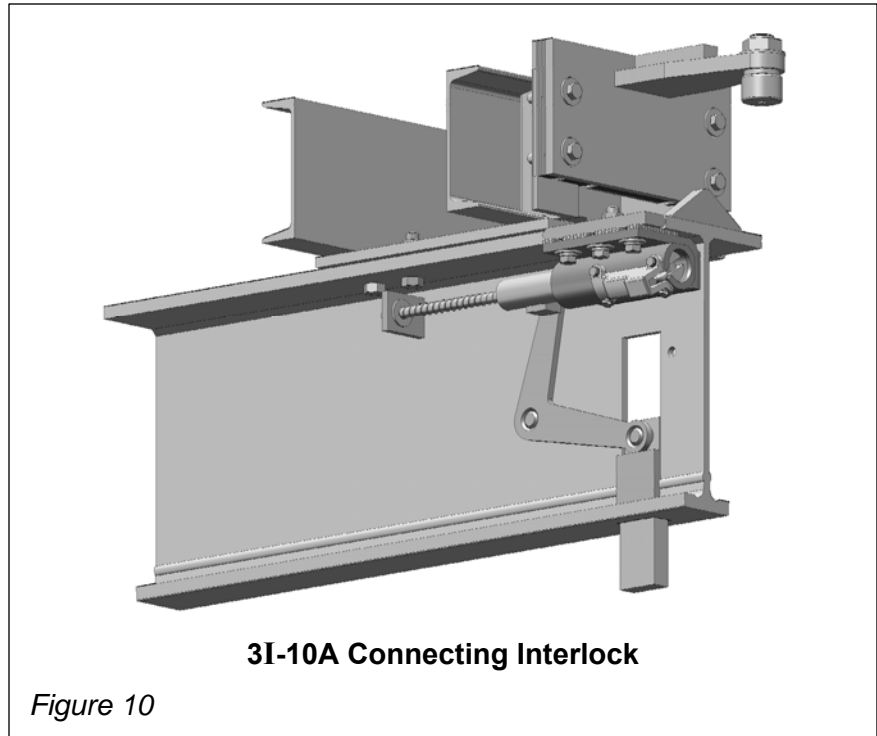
typical 3I-10A Connecting Interlock and the Gap Spacer Arm with Guide Roller (shown with a segment of a spur rail or crane bridge beam. In this view, the connecting interlock is shown as being mounted in a bridge beam, with channels to represent an end truck frame).
